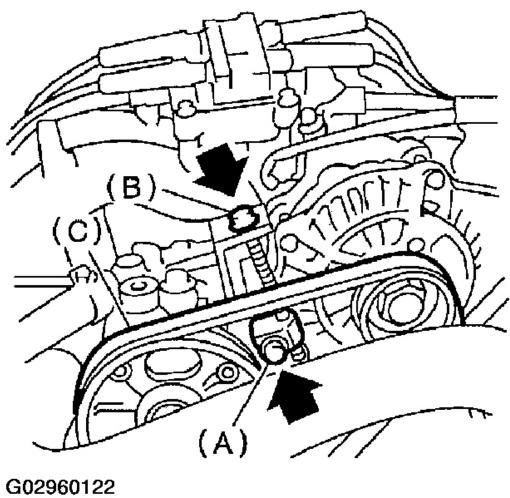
Removing Front Side Belt Courtesy of SUBARU OF AMERICA, INC.
